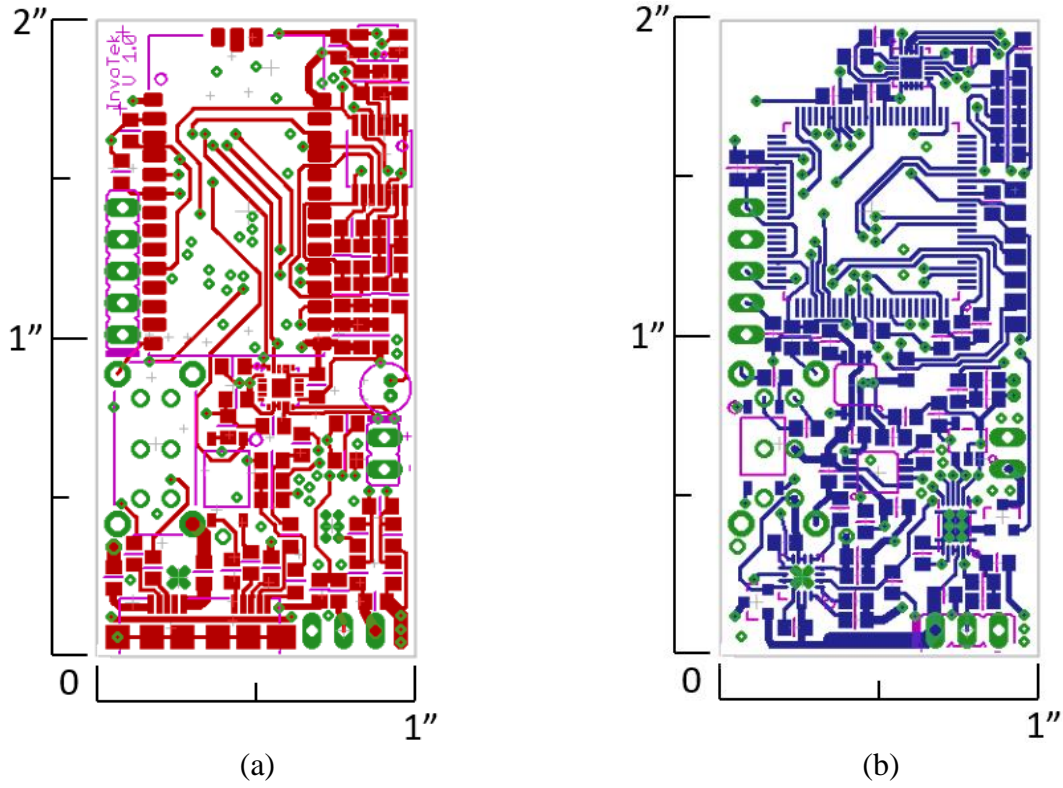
PCB Layout: (a) Top Side and (b) Bottom Side
